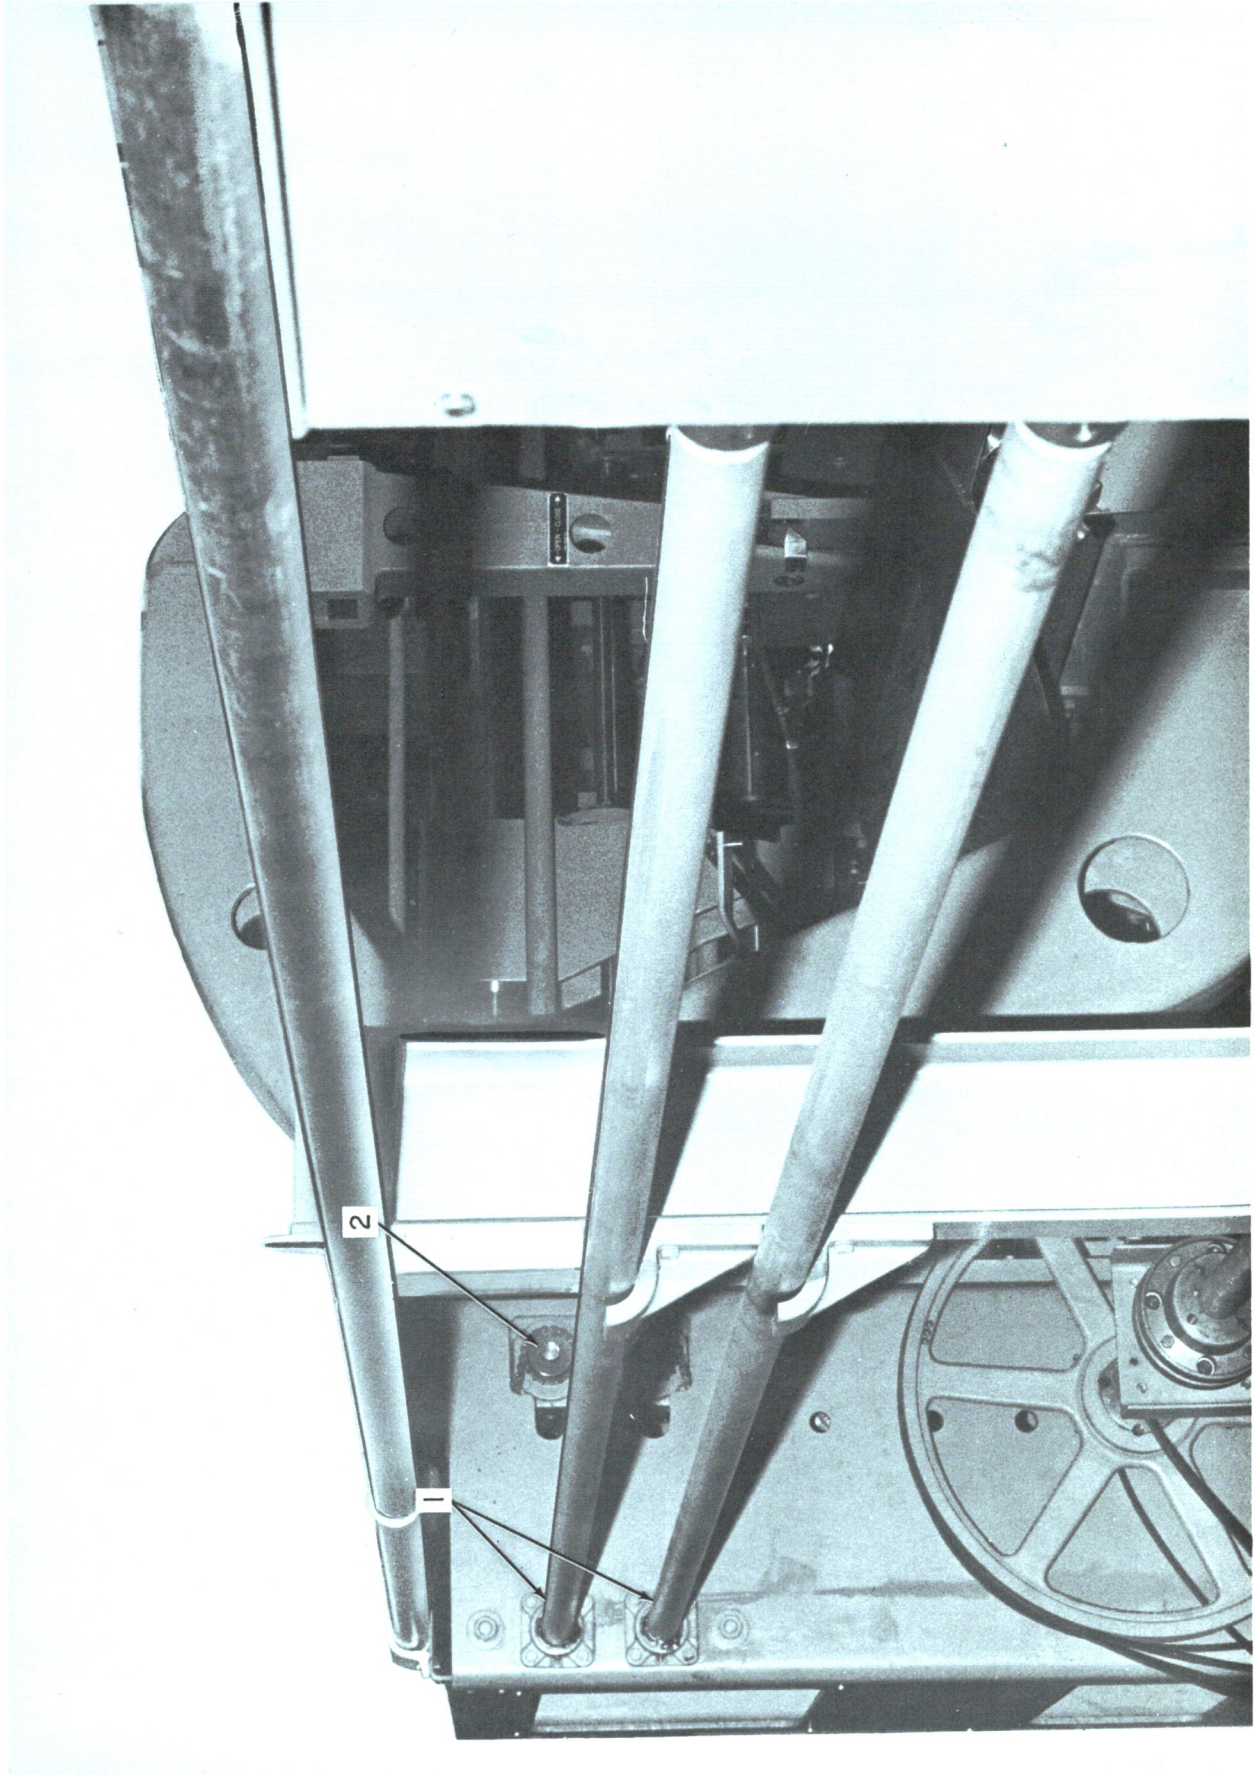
FOLDING SECTION LUBRICATION (VIEW 4)
